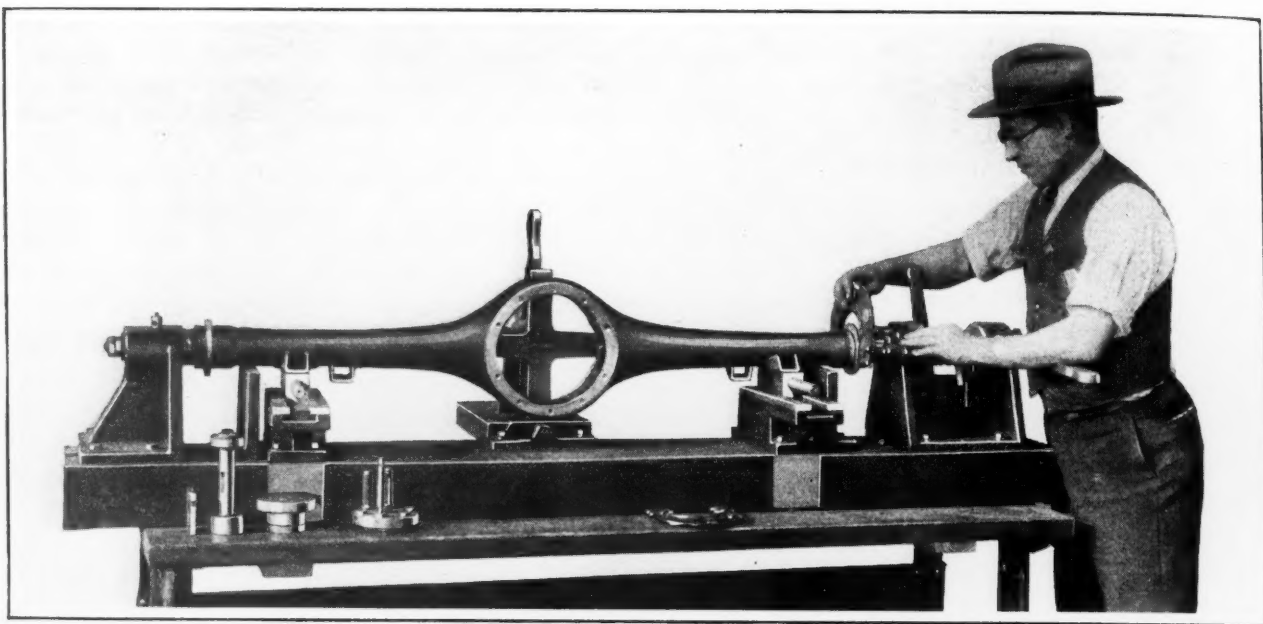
Fixture which Facilitates the Careful Inspection Given Each Axle Housing at the End of All Operations
